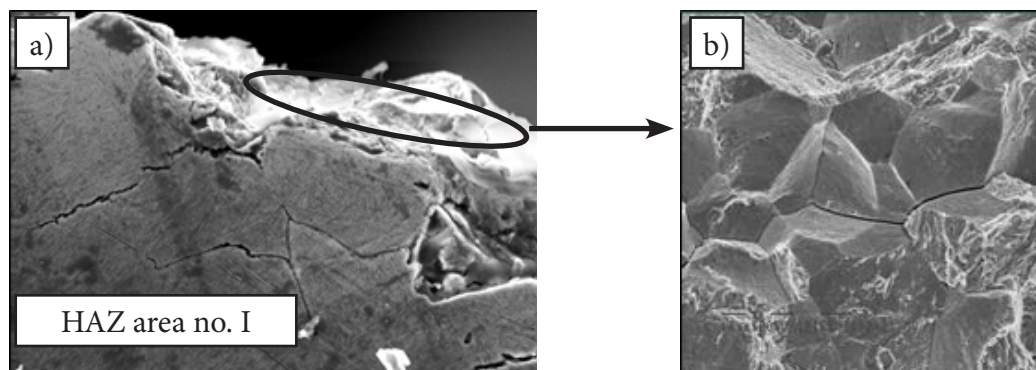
Welded joint microstructure in the crack zone (a) and the surface of the fracture (b), $\times 1010$, $v_w = 5 \text{ mm/s}$.
